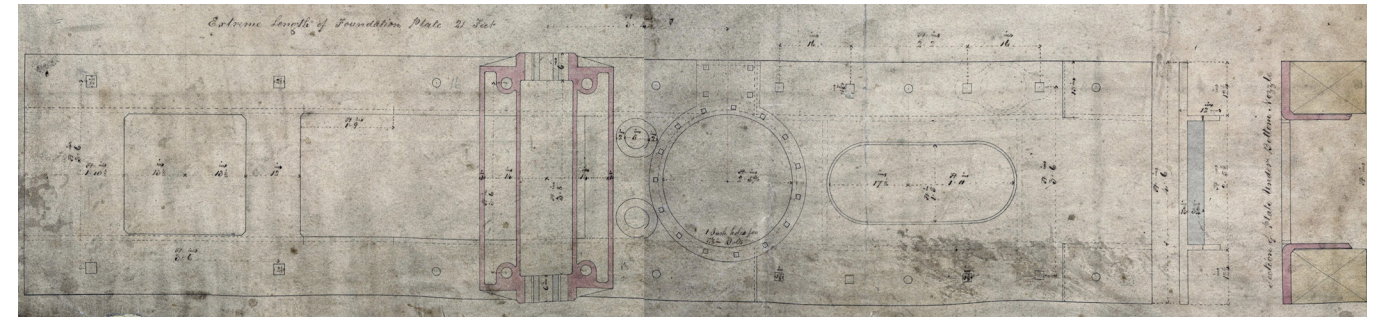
Detail of a Neath Abbey Ironworks engineering drawing depicting the plan view of a foundation plate for a condensing side-lever engine built for *Mountaineer*. Note the rectangular area in the center, indicating the location of the condenser with gudgeons for the side levers and the circular area immediately to the right, indicating the location of the air pump cylinder. (Image Courtesy of the West Glamorgan Archive Service: D/D NAI/S/35/3).
